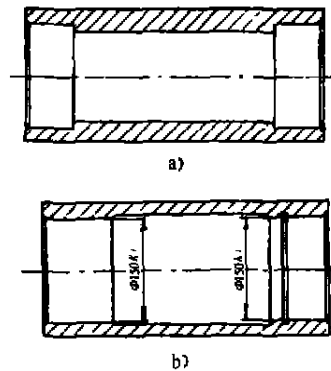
Structure of the bearing support before (a) and after the innovation (b)
